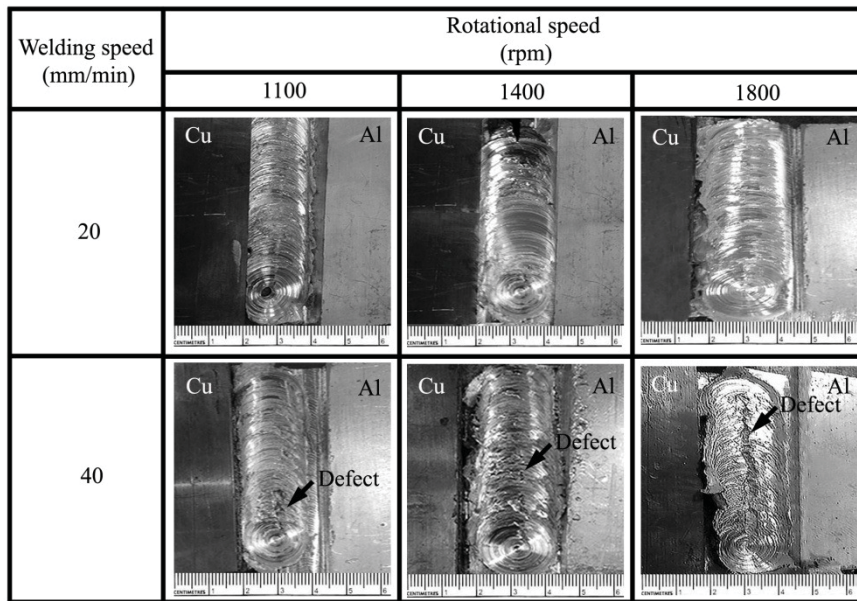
Surface morphology the dissimilar FSW Al6063-Cu joints fabricated under various process parameters.
